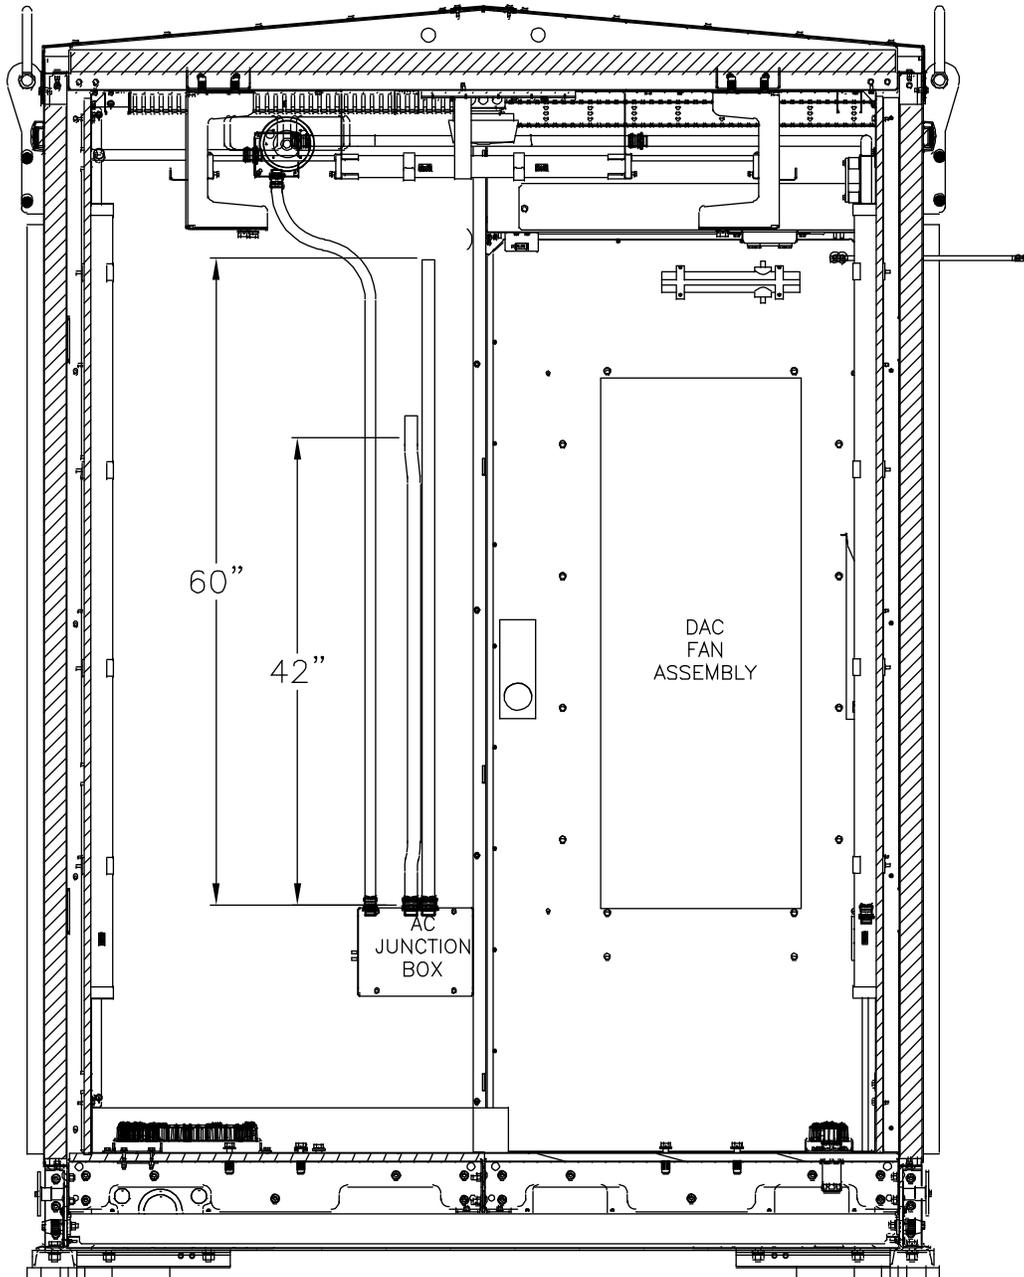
WIC Wall Detail Views (cont'd from previous page, cont'd on next page)
